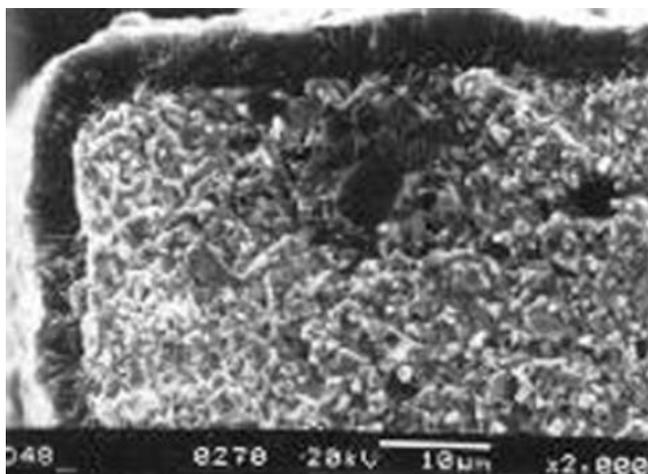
SEM fractograph of cutting edge after diamond deposition.
